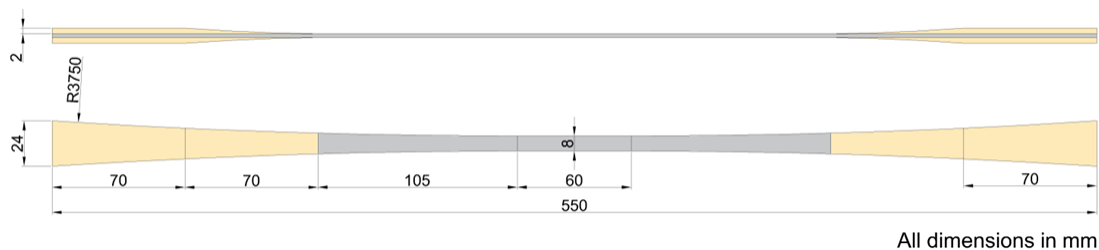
Geometry and dimensions of X-butterfly test specimens.
